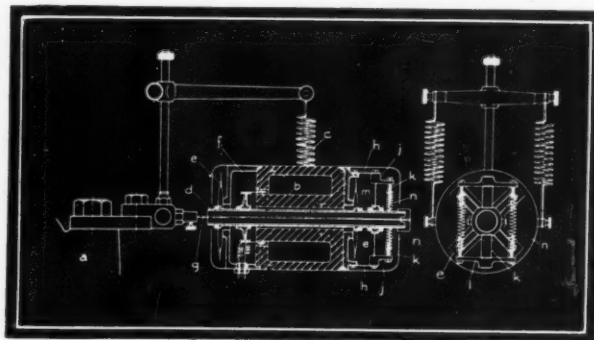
Cross section through generator of dynamic balancer as mounted on machine pedestal
